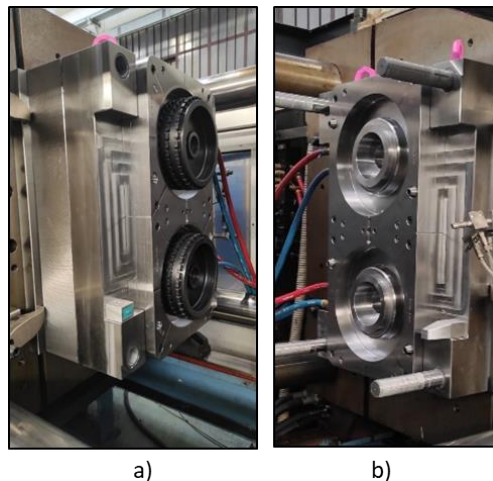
The a) moving and b) stationary plates of the reconfigurable mould with the cavity inserts assembled.
